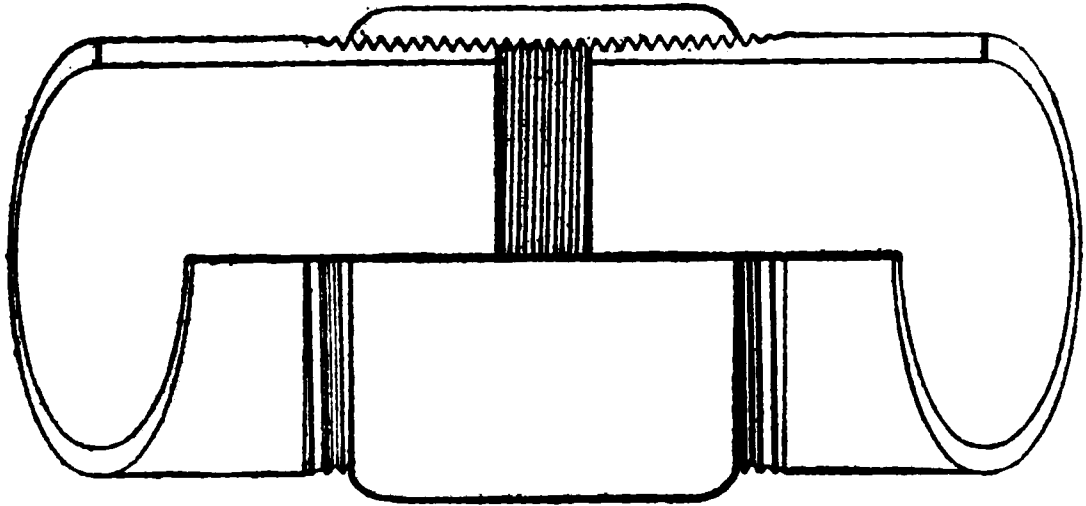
Typical Section of Standard Pipe Coupling and Joint
